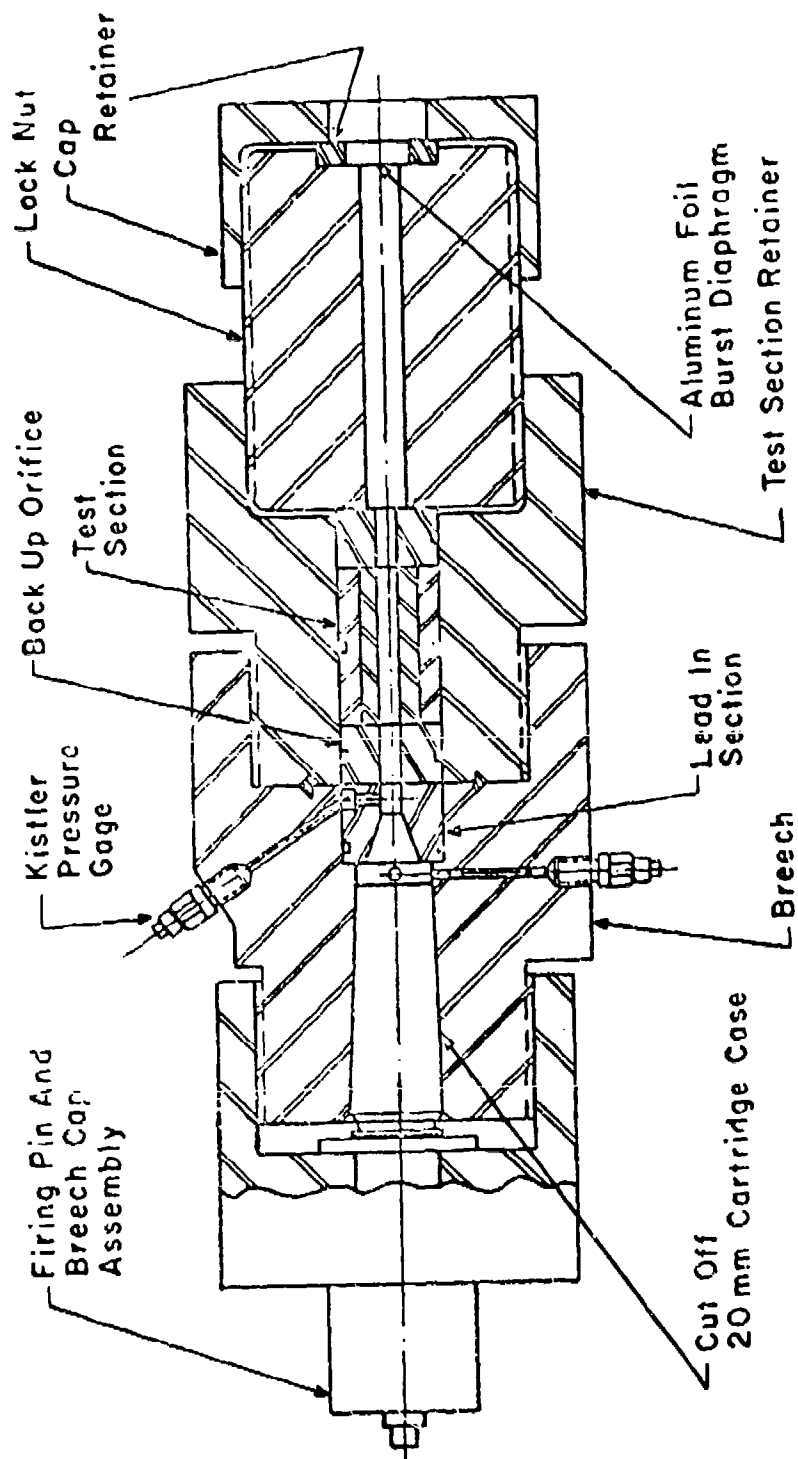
SCHEMATIC VIEW OF THE VENTED BOMB FIXTURE.
